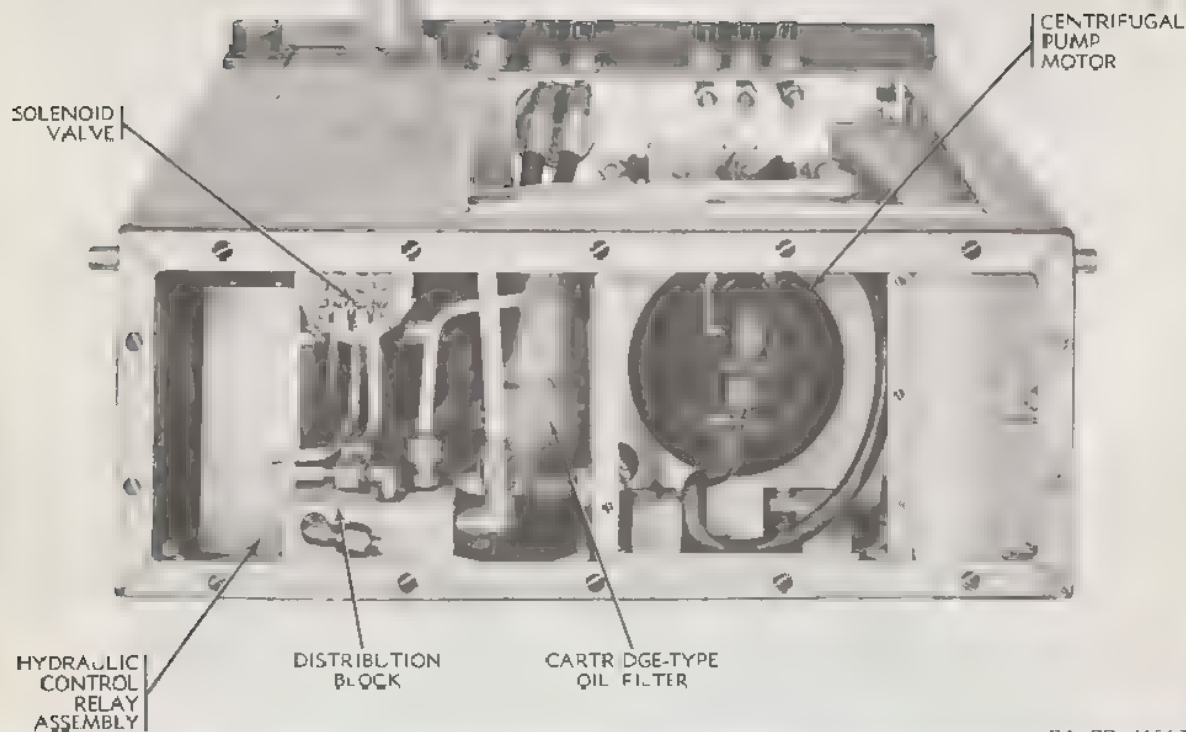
(U) Hydraulic control unit—front view—cover removed.
